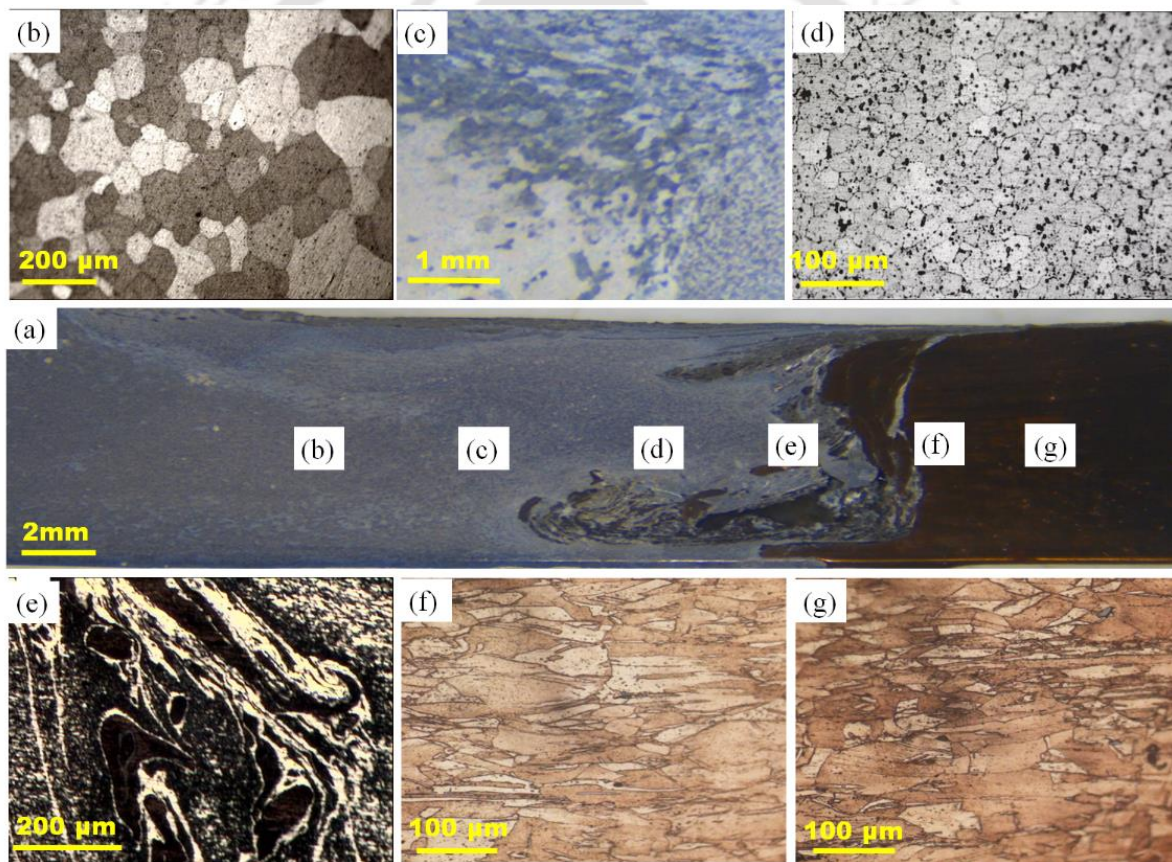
Microstructures of different zone at welding condition of 2 mm of tool offset, 815 rpm, 98 mm/min welding speed and without any preheating: (a) macrograph of weld zone, (b) HAZ in the aluminium side, (c) TMAZ in the aluminium side, (d) SZ in the aluminium side, (e) SZ in the copper side, (f) TMAZ in copper side and (g) HAZ in the copper side.
